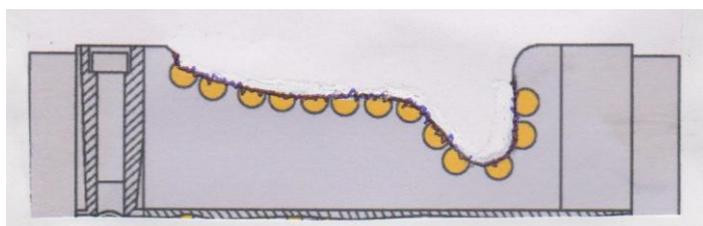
Typical wear of the rollers and their bearing surfaces in rails
